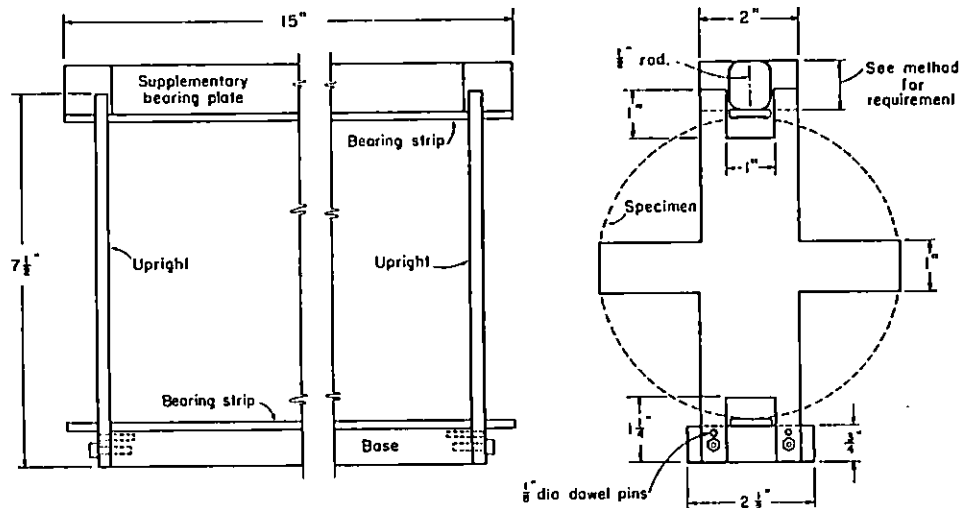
Detailed Plans for a Suitable Aligning Jig
